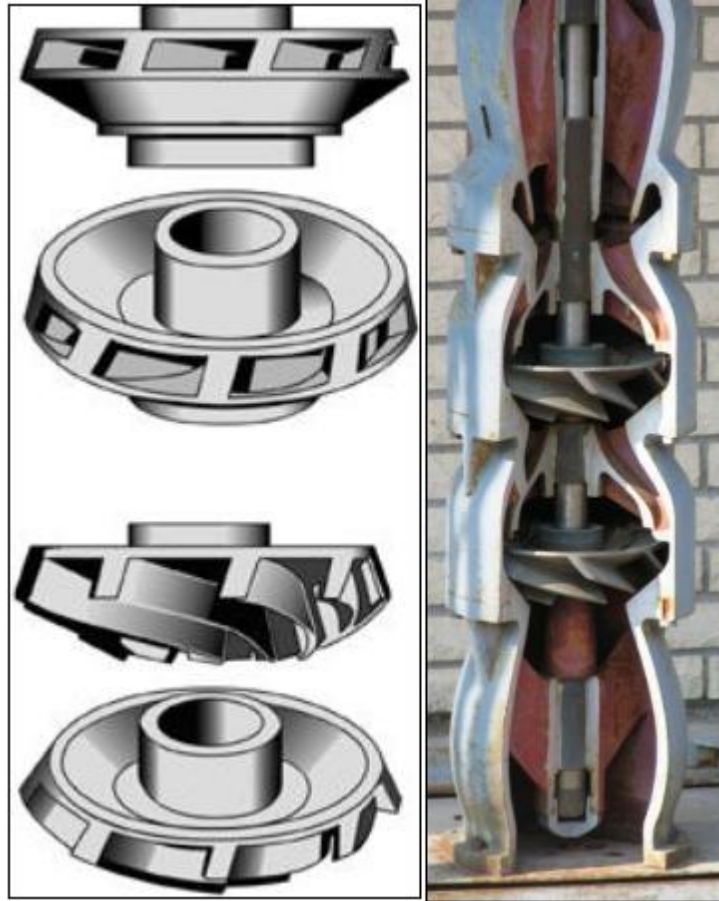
Turbine pump impellers and two-stage bowl assembly cross-section [6]
